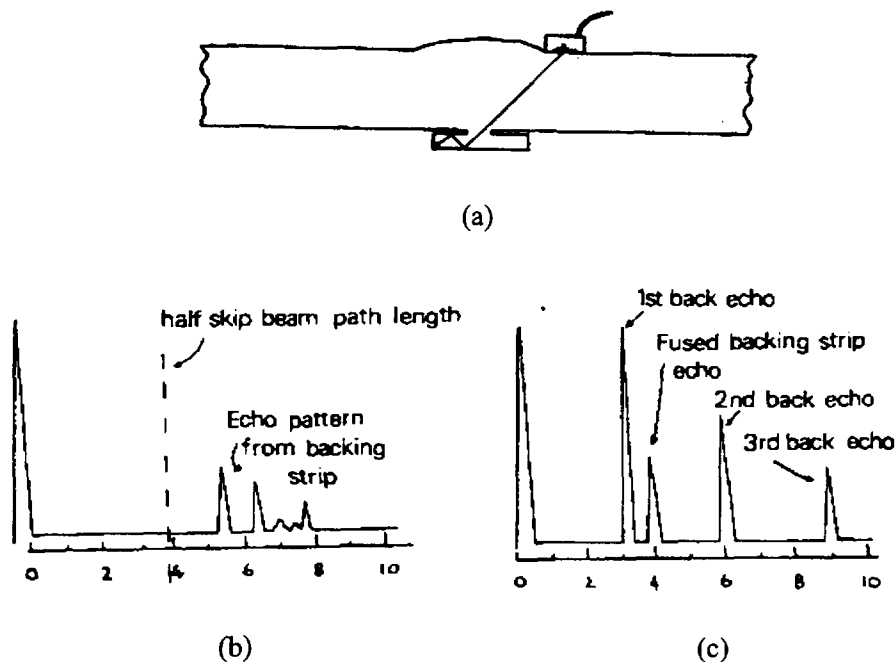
(a) Cross section of welds with backing strip, (b) CRT indication of root scan with angle beam probe, (c) with normal beam probe.
